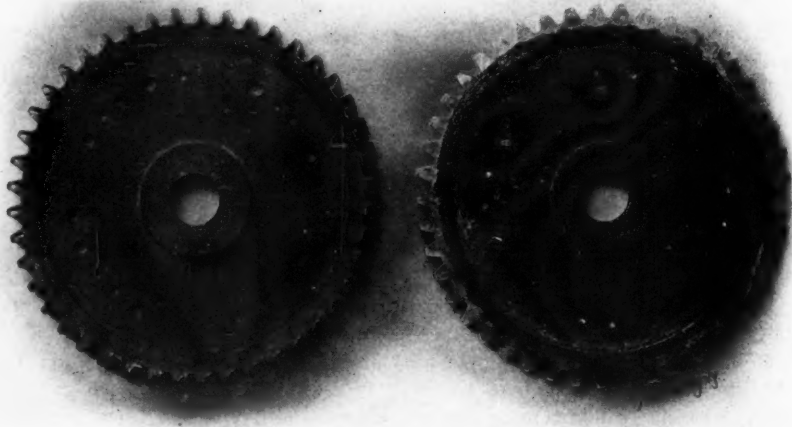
Rolled Gears before and after the Flash is trimmed from the Ends of the Teeth
